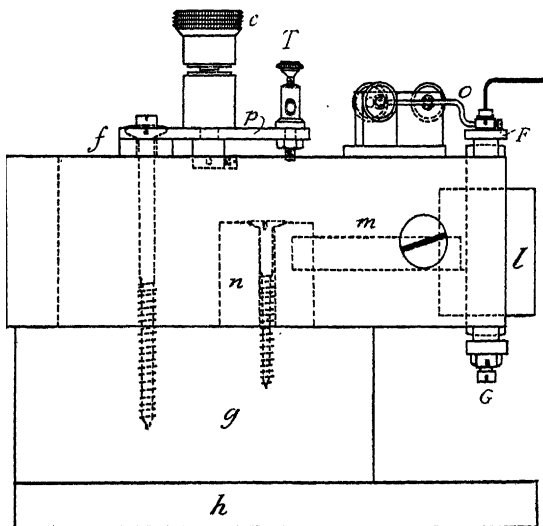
Side Elevation of Part of Moving Coil Indicator, three-quarters of actual size.
